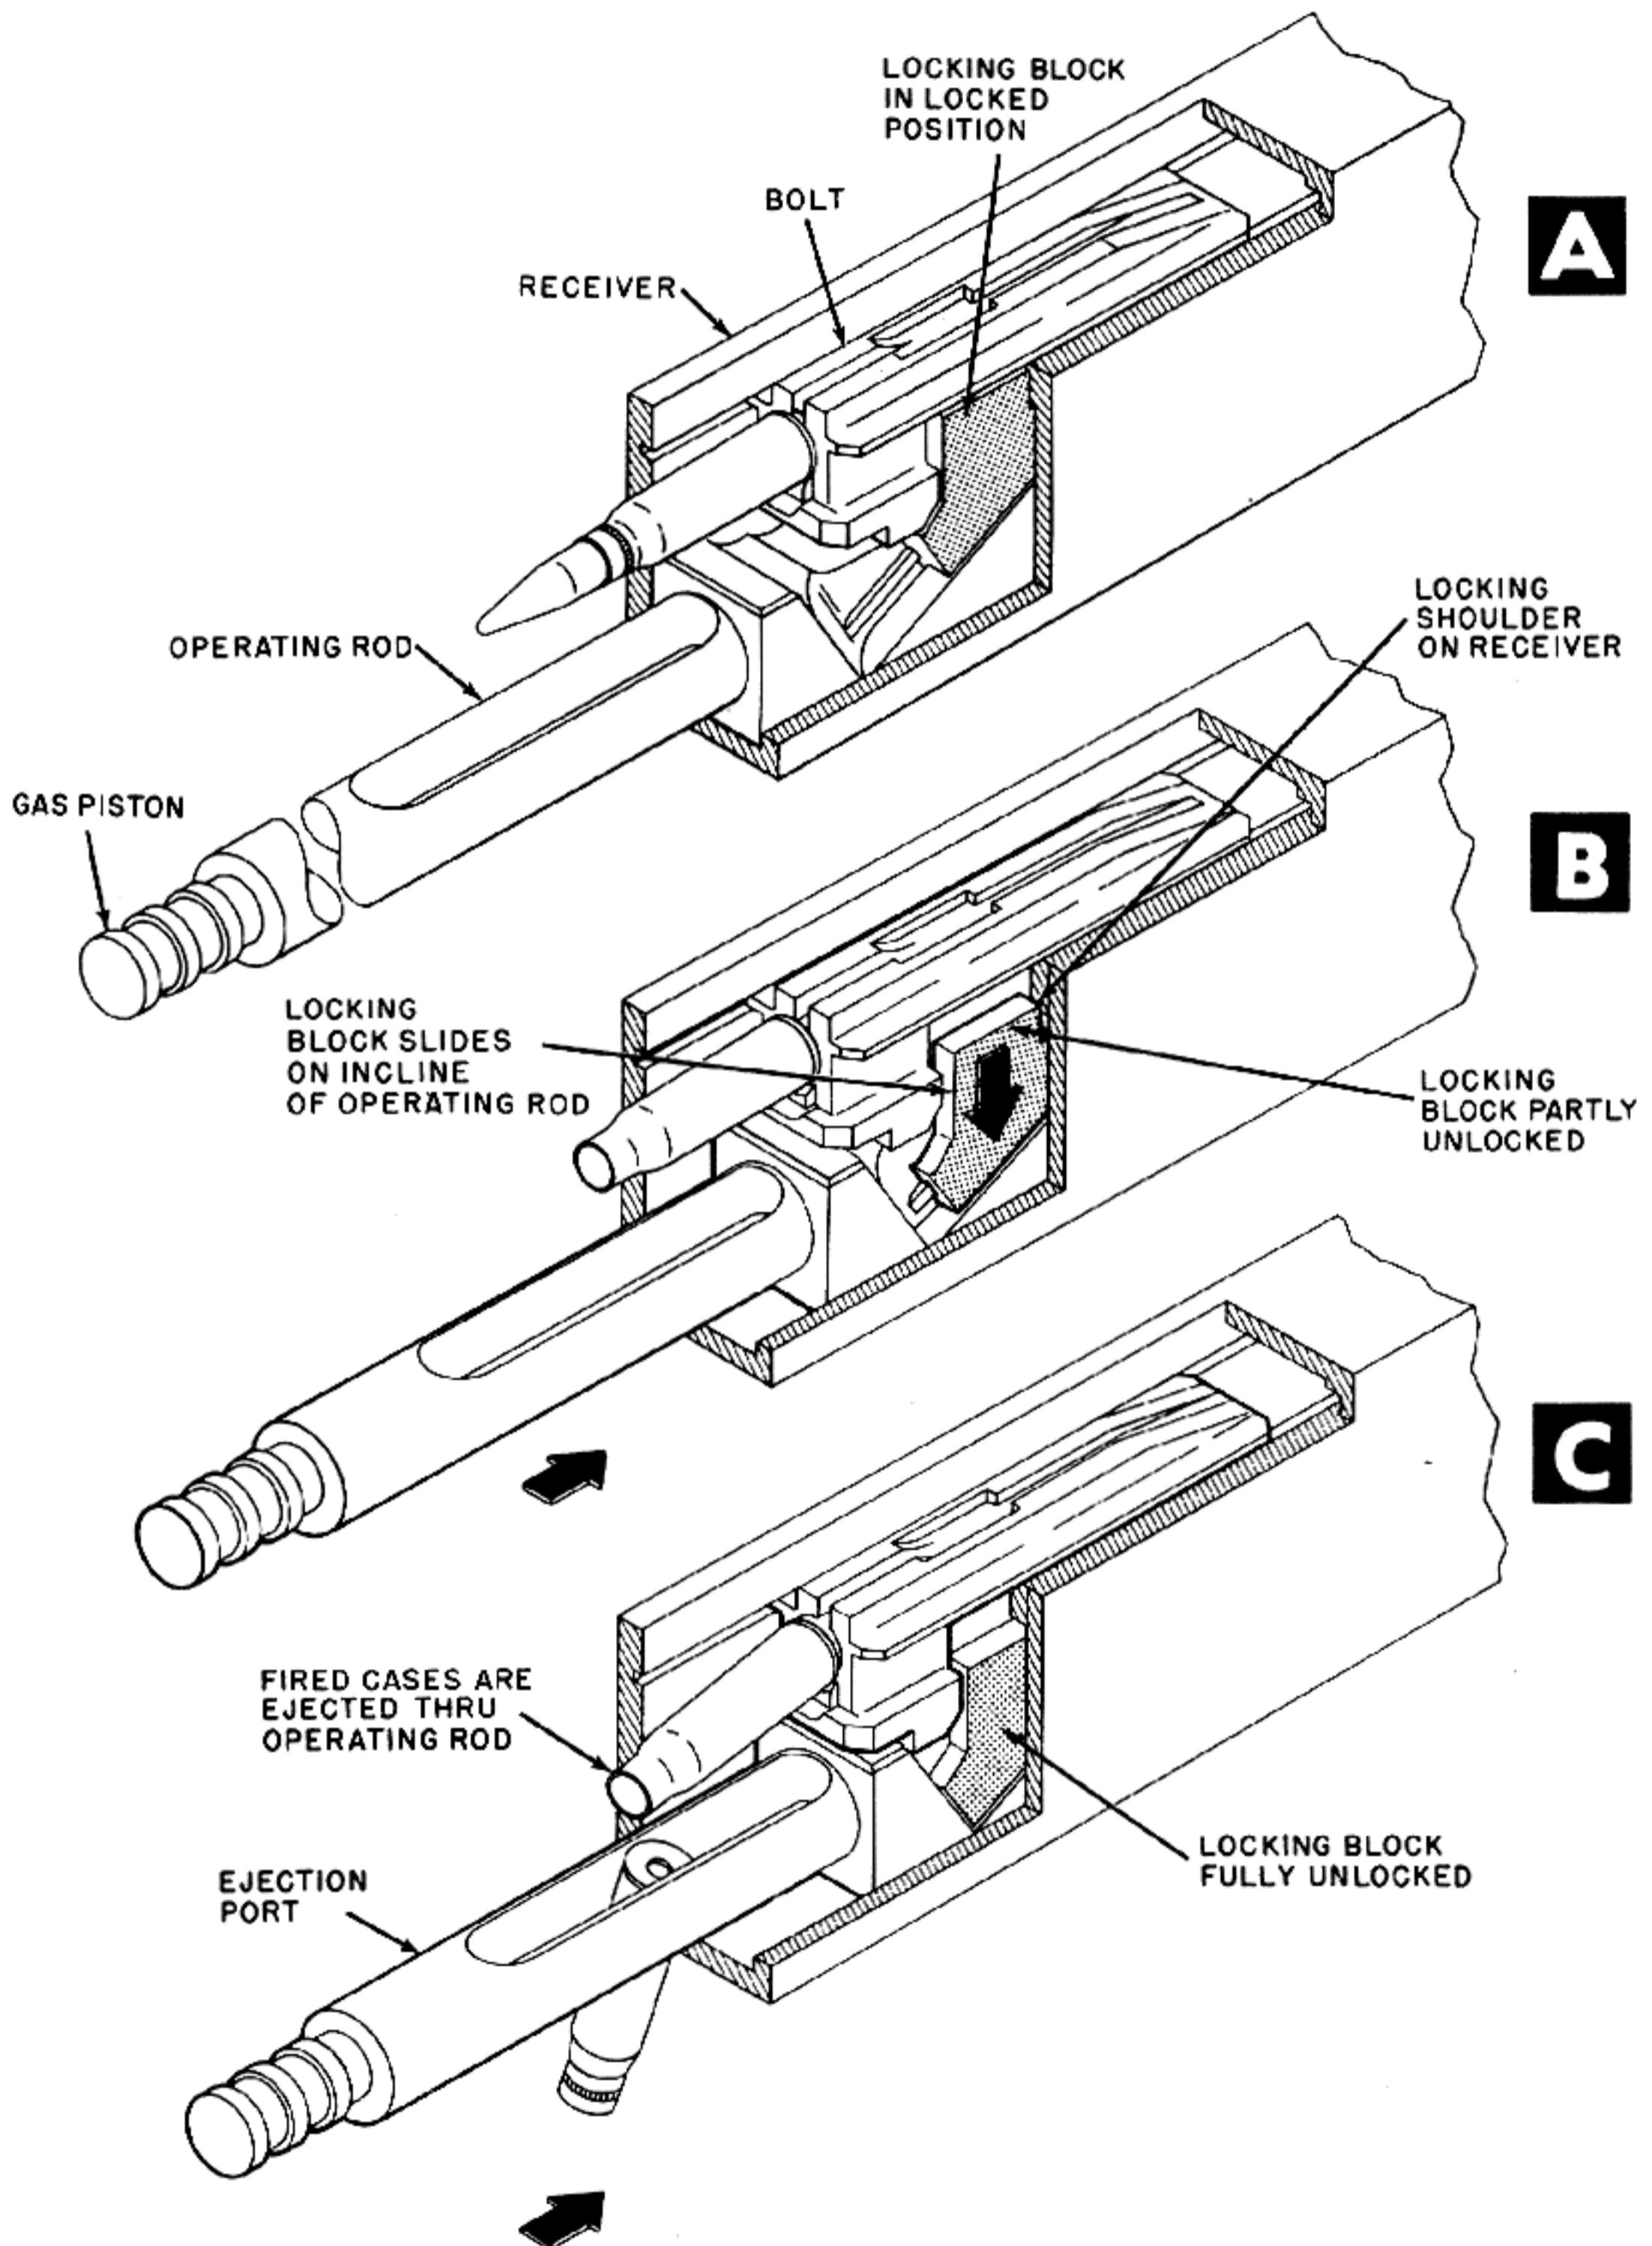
Operating Rod Cams Locking Block Free of Locking Surfaces of Receiver.
